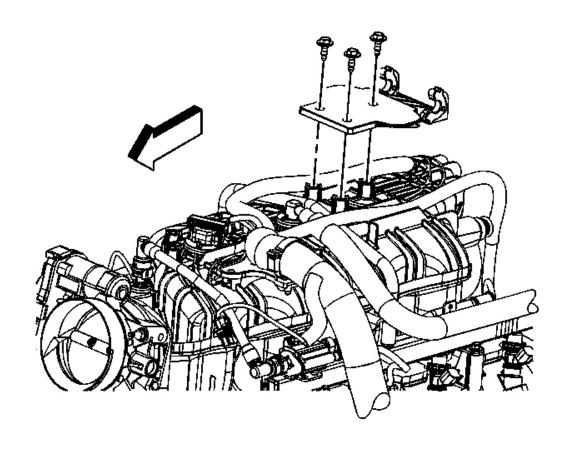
Manifold Sight Shield Retainer Bolts Courtesy of GENERAL MOTORS CORP.
